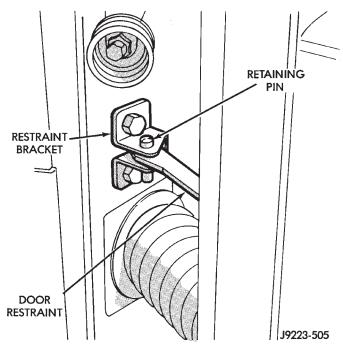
Door Restraint (Check) Retaining Pin INSTALLATION
